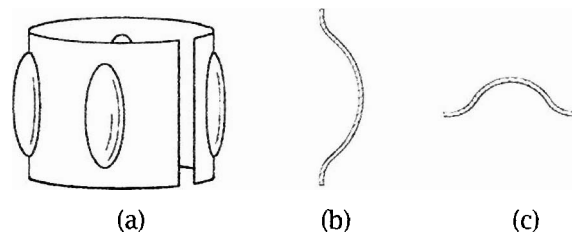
Tolerance ring. (a) Isometric view, (b) Cross sectional view in a vertical axis and (c) Cross sectional view in a horizontal axis.
